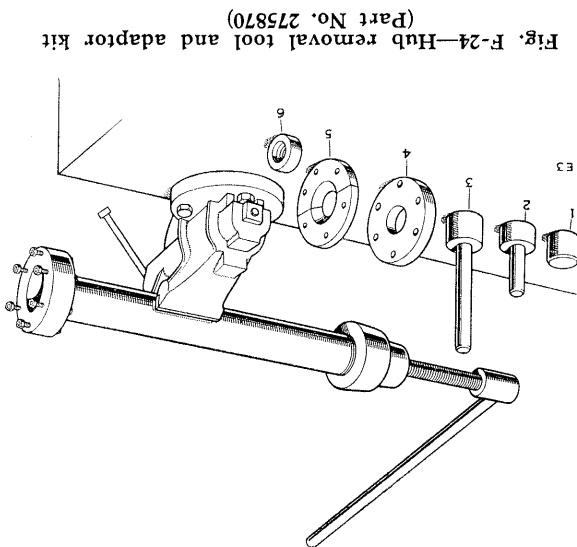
Hub removal tool and adaptor kit (Part No. 275870)
